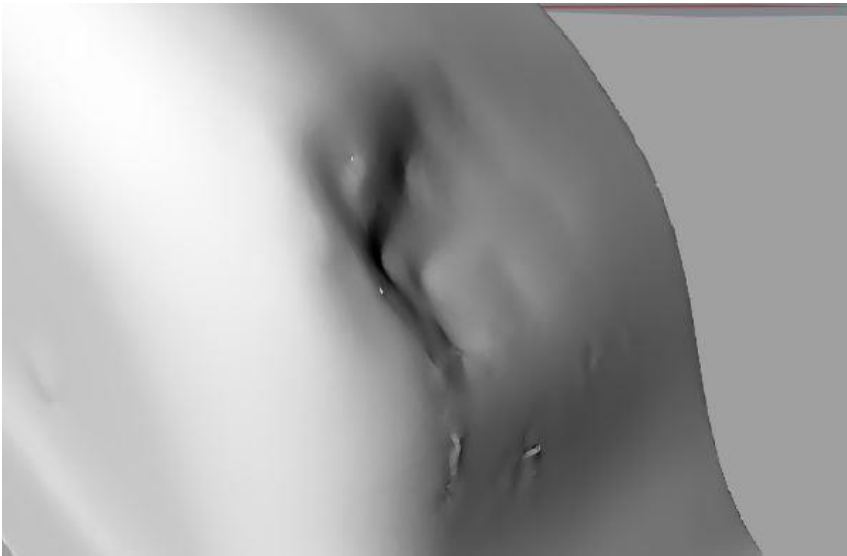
Dent made using a Hammer on the Manufactured Model
